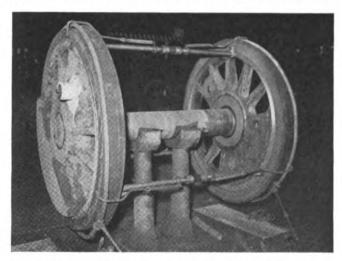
The spring clamps for holding the heated tires while they are cooling. The axle stands are also shown in this photograph
